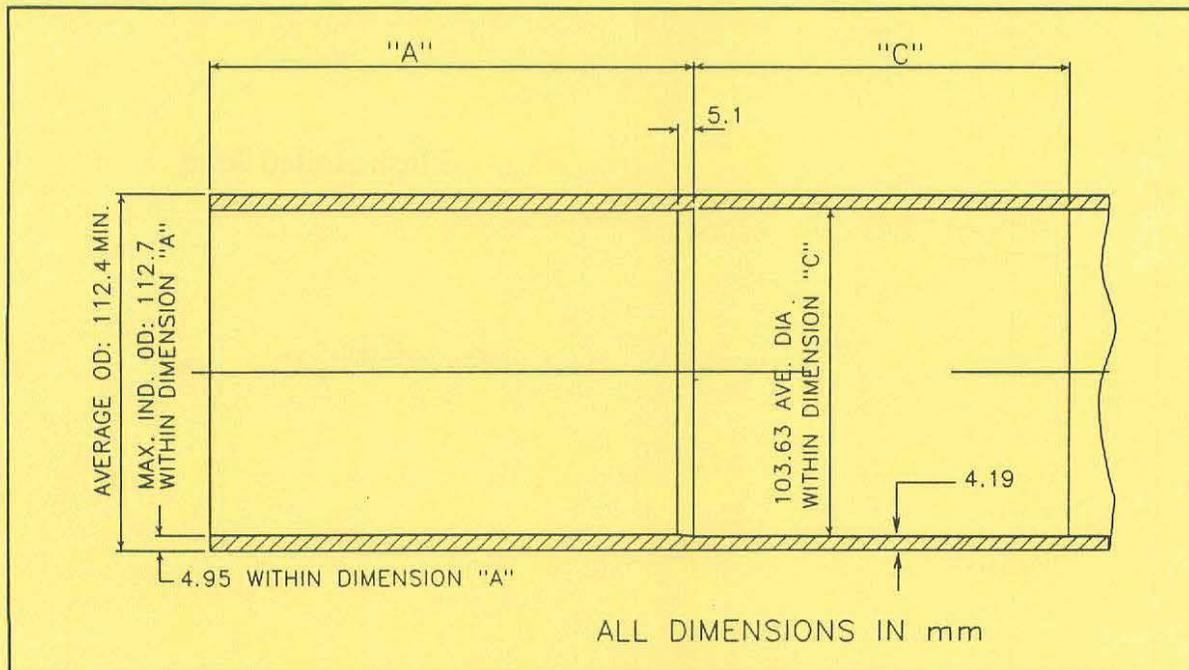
Pressure Tube Geometry - Spools for ZCRJ Fabrication
